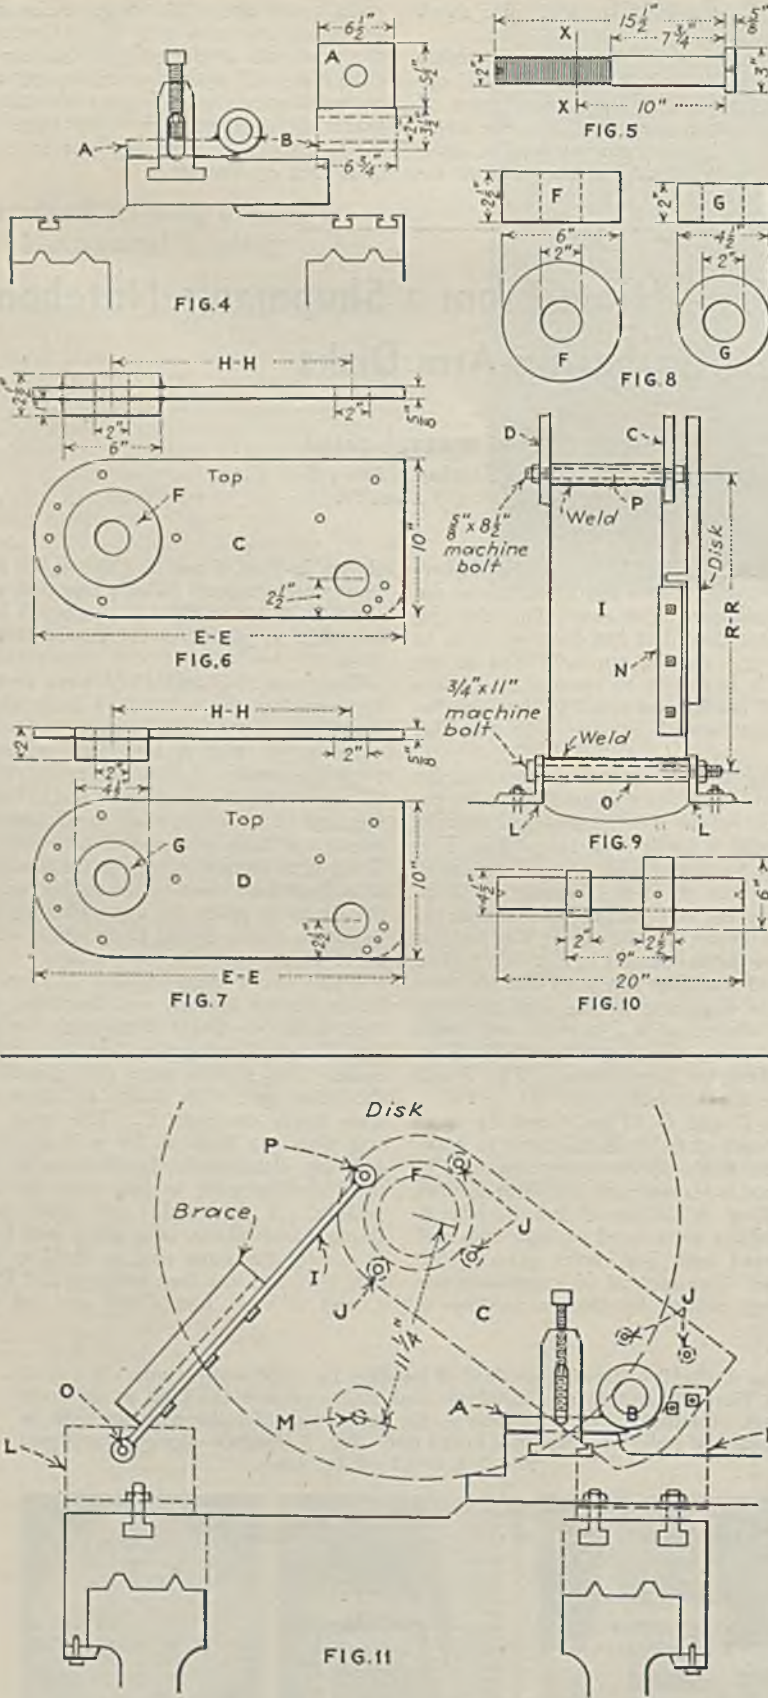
Plate C on the side of the lathe head. Next the 2-in. bolt was cut off at the line X-X (Fig. 5), and the plates were placed one on each side of Shaft B. Through the 2-in. holes drilled in the plates, the 2-in. bolt was placed with the head on Plate C. The collars were then centered and the jig was then bolted down as in Fig. 1, being held by the two No. 3 angles and two connecting plates. Connecting plates were attached to Plates C and D by two bolts each, and to the No. 3 angles by one bolt each, using the 3/4-in. holes in the angles. Collar F was then bored out to 4 1/2 in. and Collar G to 2 1/2 in., inside measurements.
